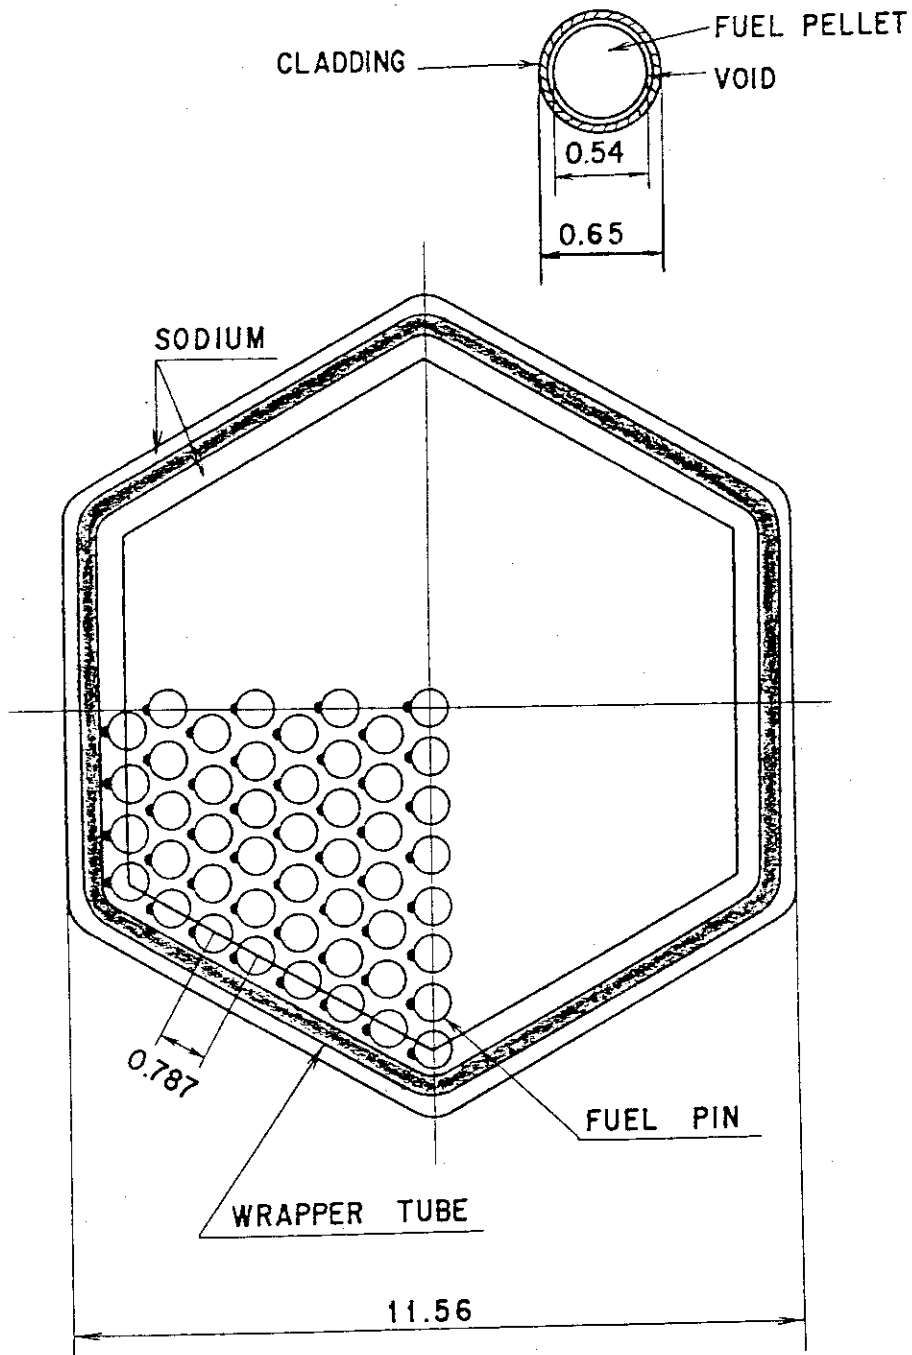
Cross sectional view of subassembly and fuel pin.
